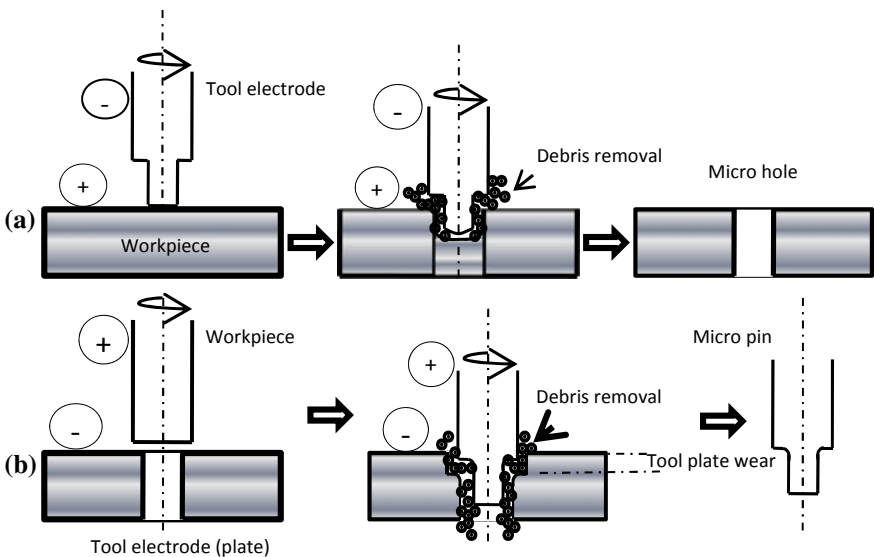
Representation of a μ EDM-drilling and b R- μ EDM process and debris removal [10]
